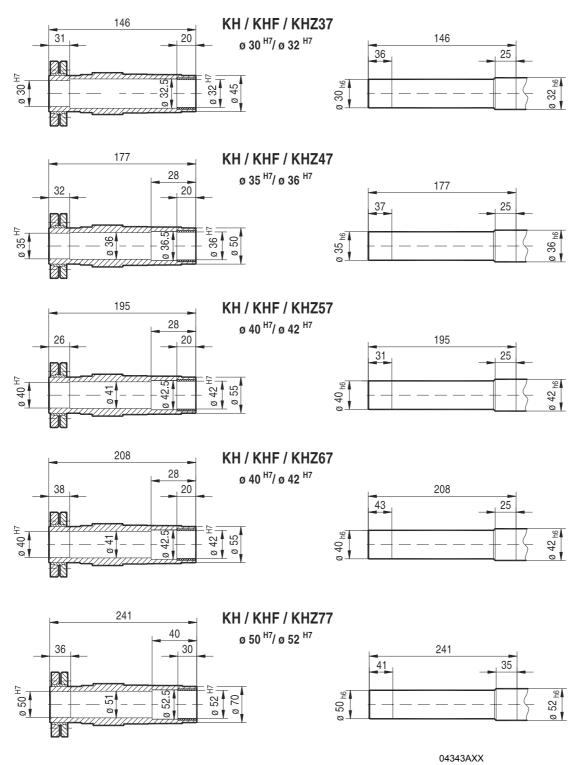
Shouldered hollow shaft KH/KHF/KHZ37...77
